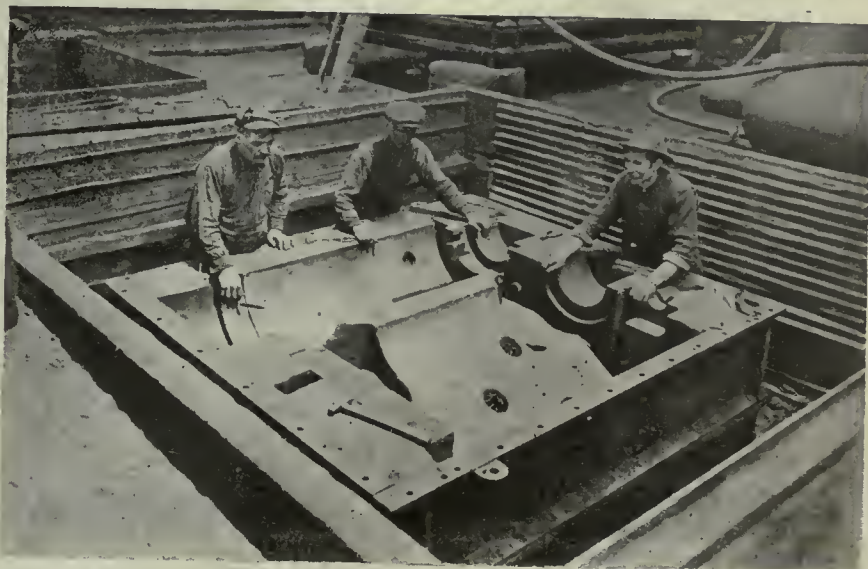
DRAG FOR HIGH PRESSURE " PISTON VALVE CYLINDER." NAILS DRIVEN INTO HEAVY BOSSES ARE TO PREVENT SHRINK HOLES FROM UNEVEN COOLING.
